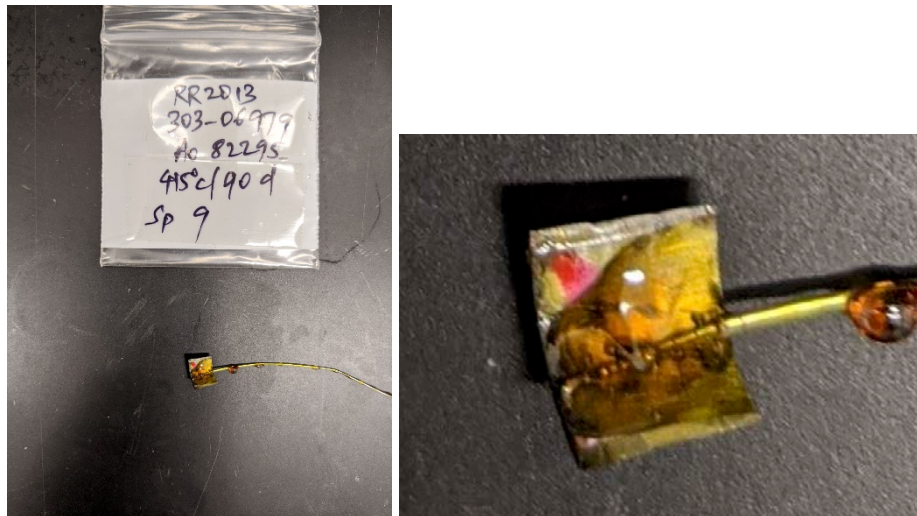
Polyimide coated unirradiated oxidized specimen (spot-welded side)
